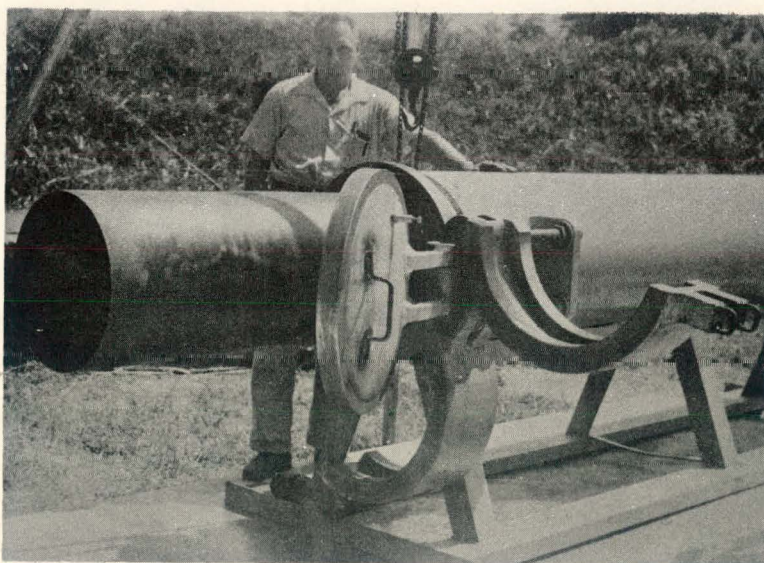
A 4130 steel rocket motor tube 11 feet long by 18 in. diameter shown partially inside the sizing die. This work is carried out by Propellax Corporation.
